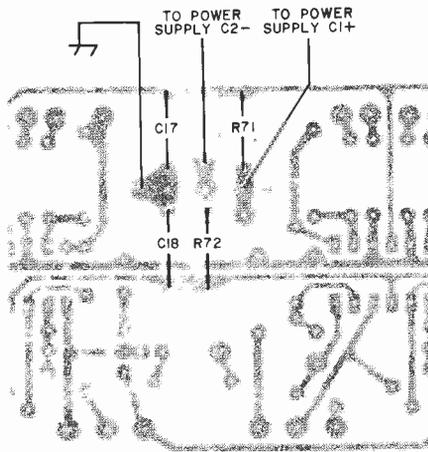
Special wiring of the main pc board for use with an ac power supply.
